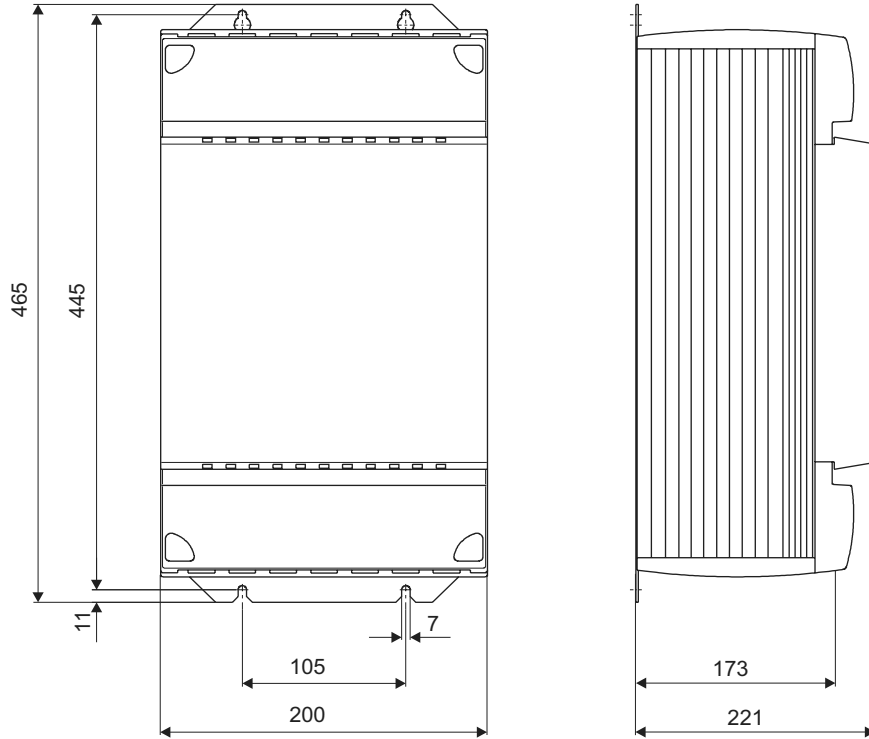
Dimension drawing for MDR60A size 3, dimensions in mm
